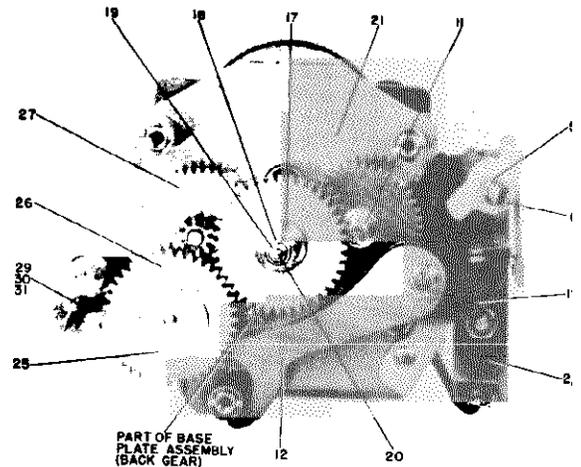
Front View of C51 Clocks—Front Plate Removed
